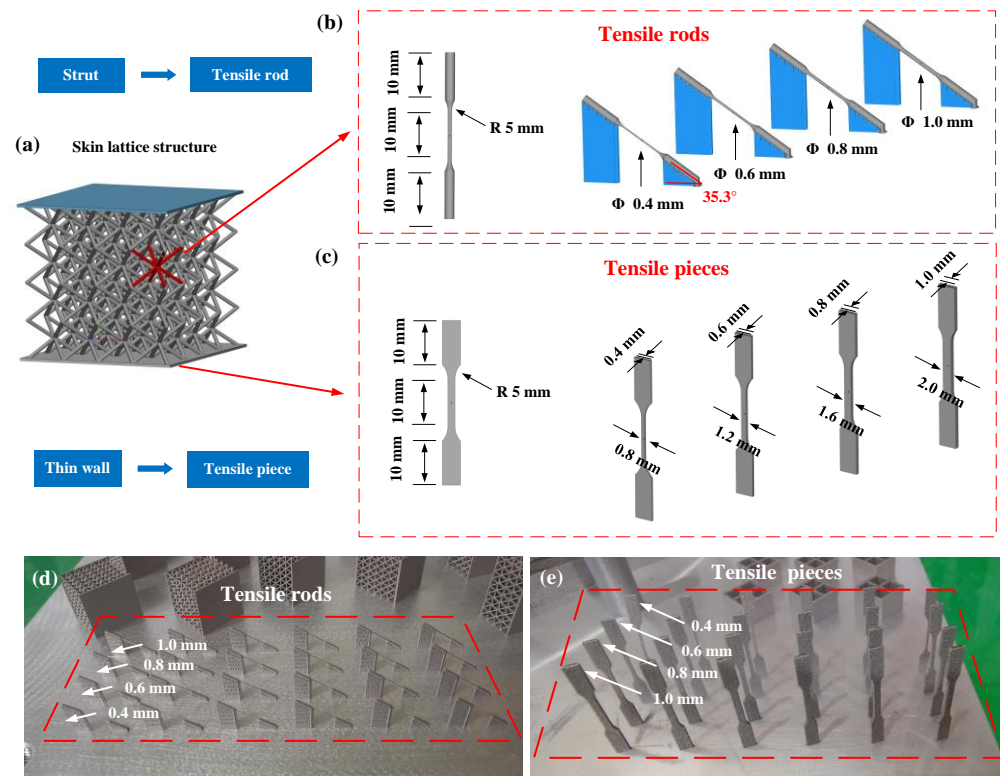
Specimen design for tensile test. (a) Skin lattice structure. (b) Tensile test rods. (c) Tensile test pieces. (d) As-built tensile test rods. (e) As-built tensile test pieces.
